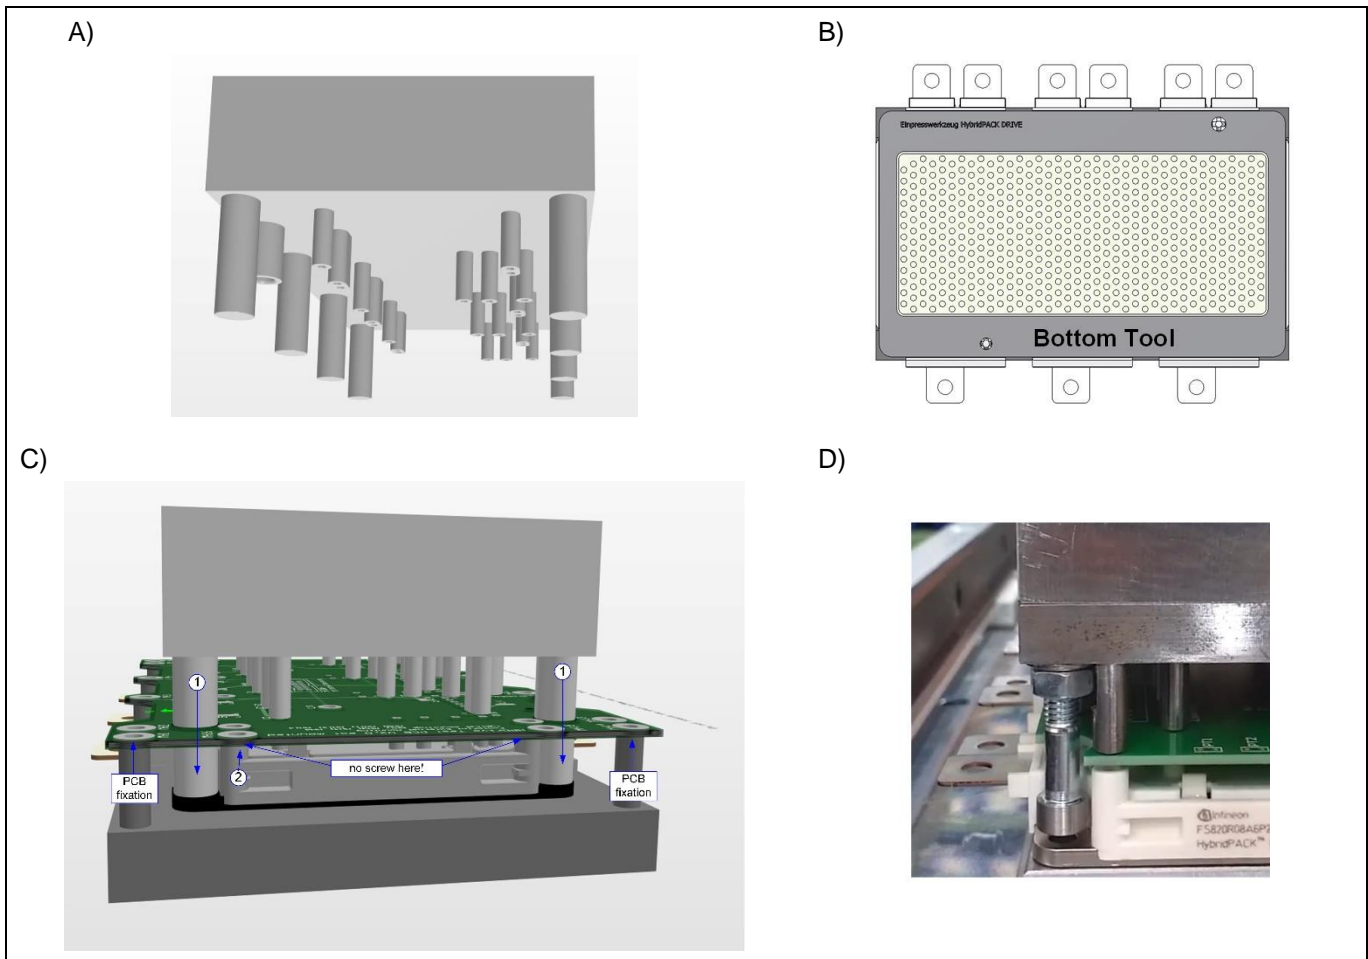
Press-tool schematic top (A) and bottom (B). The top tool is designed with standoffs which provide a distance to the baseplate surface (C). The picture in (D) show a implementation example with adjustable distance keepers.
